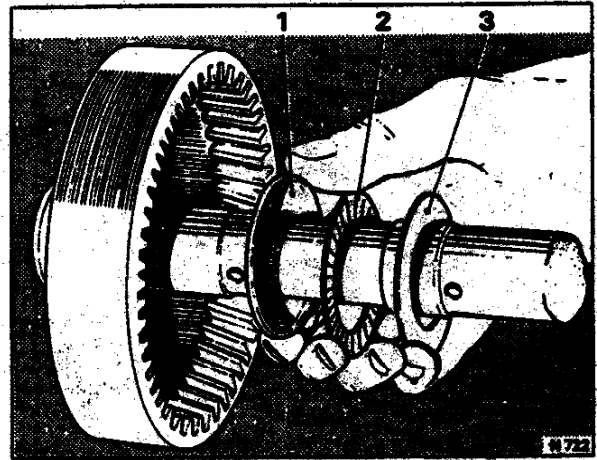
Fitting the races and thrust bearing to the inner face of the rear internal gear
